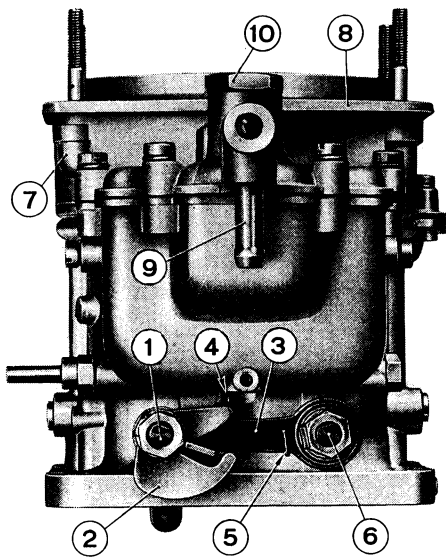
Weber 34 DCHD 4 carburetor for engine 115 C.005.
